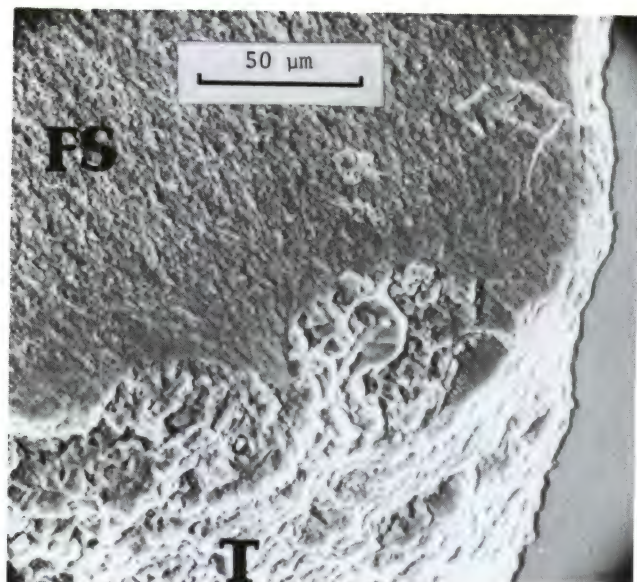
Combined cycle NC 132 sample fracture surface showing a pit on sample corner. Fracture stress was 303 MPa.
